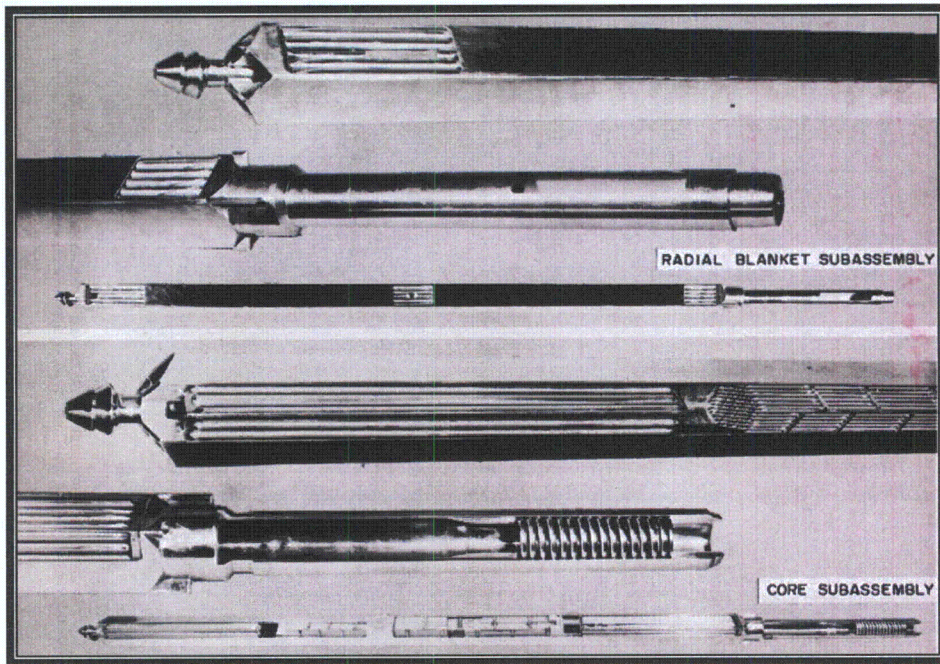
Cut-away of core and blanket subassemblies (Courtesy DECo)
